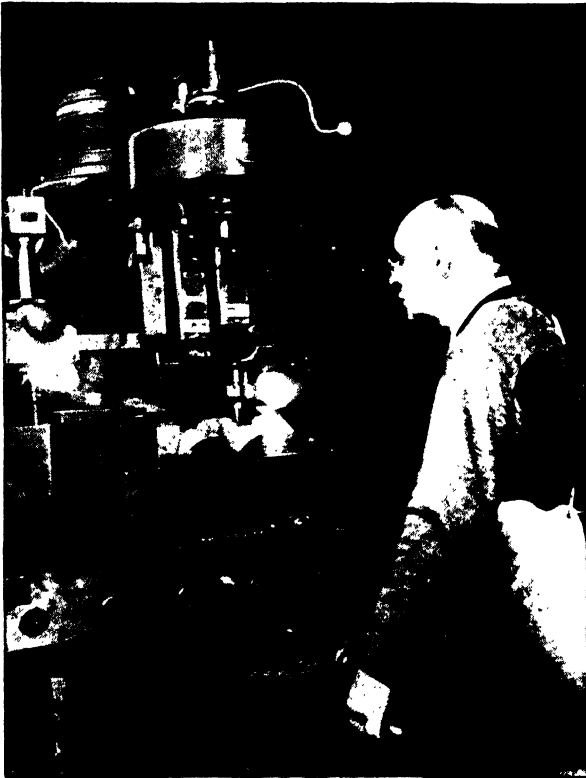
This toolmaker is sinking a die for making the radius-rod foot. The equipment is a die-sinking machine that has a duplicating attachment.
